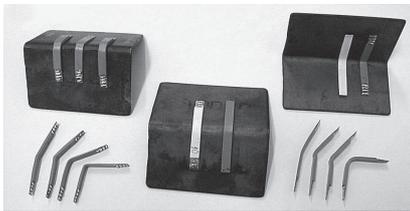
Samples of the LTCC bended strips with an example of the difference between inside and outside bending angles.
